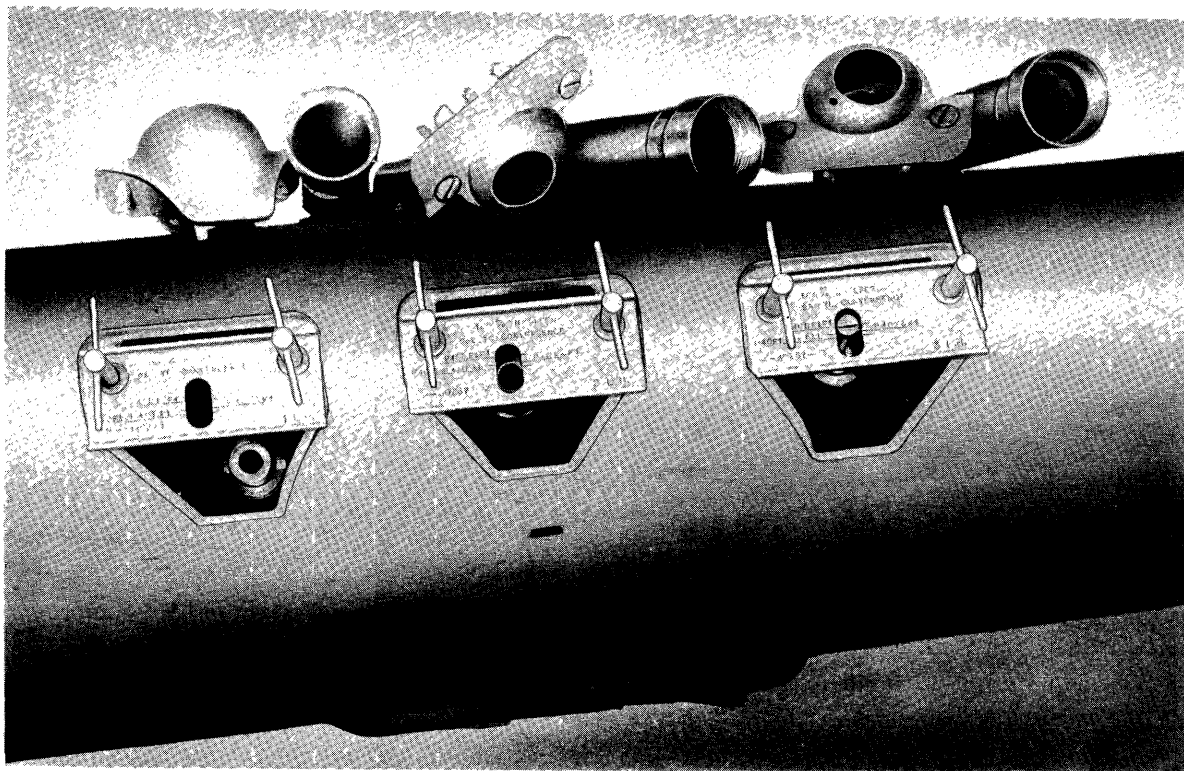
Left-Hand Fixture, No. 1, No. 2 and No. 3 Installed
